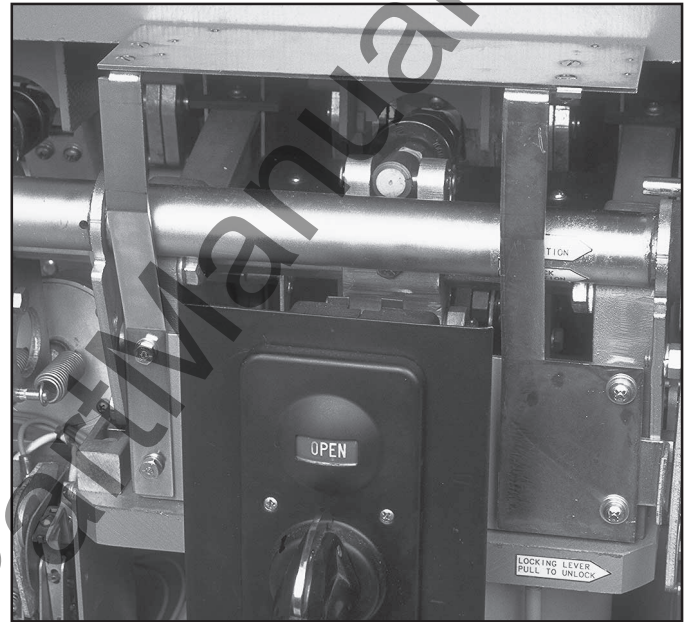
Trip Unit Mounting Platform Assembly Installed on the Breaker
